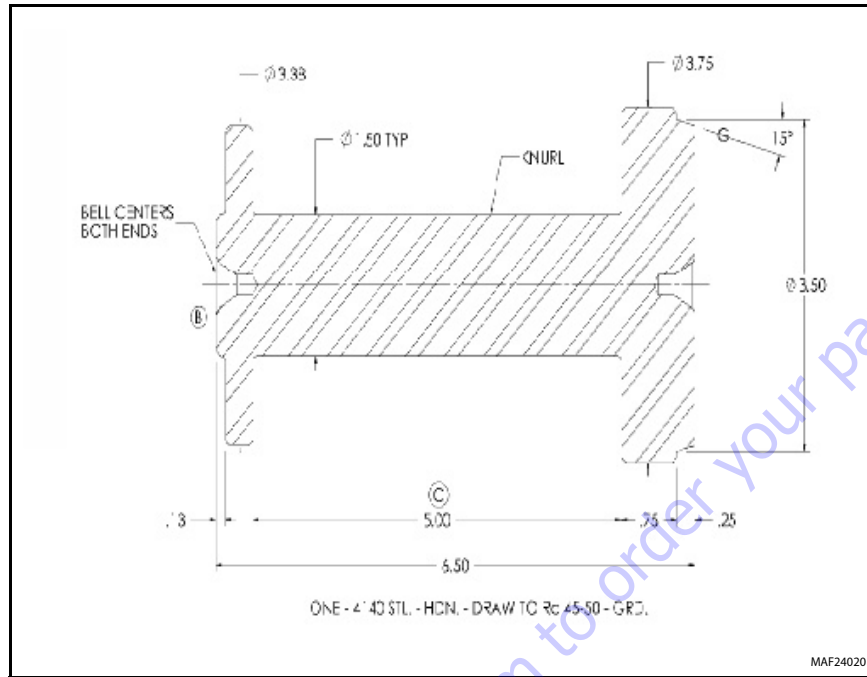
Bearing Cup Pressing Tool (T155291)
